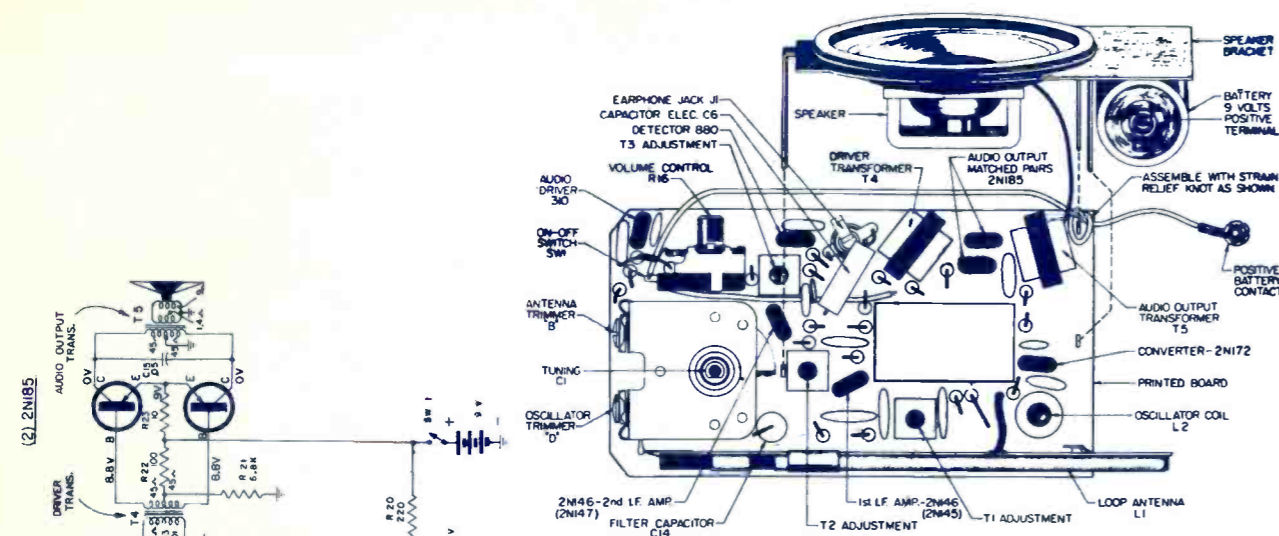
Top View Parts Layout with Speaker Raised from Board
